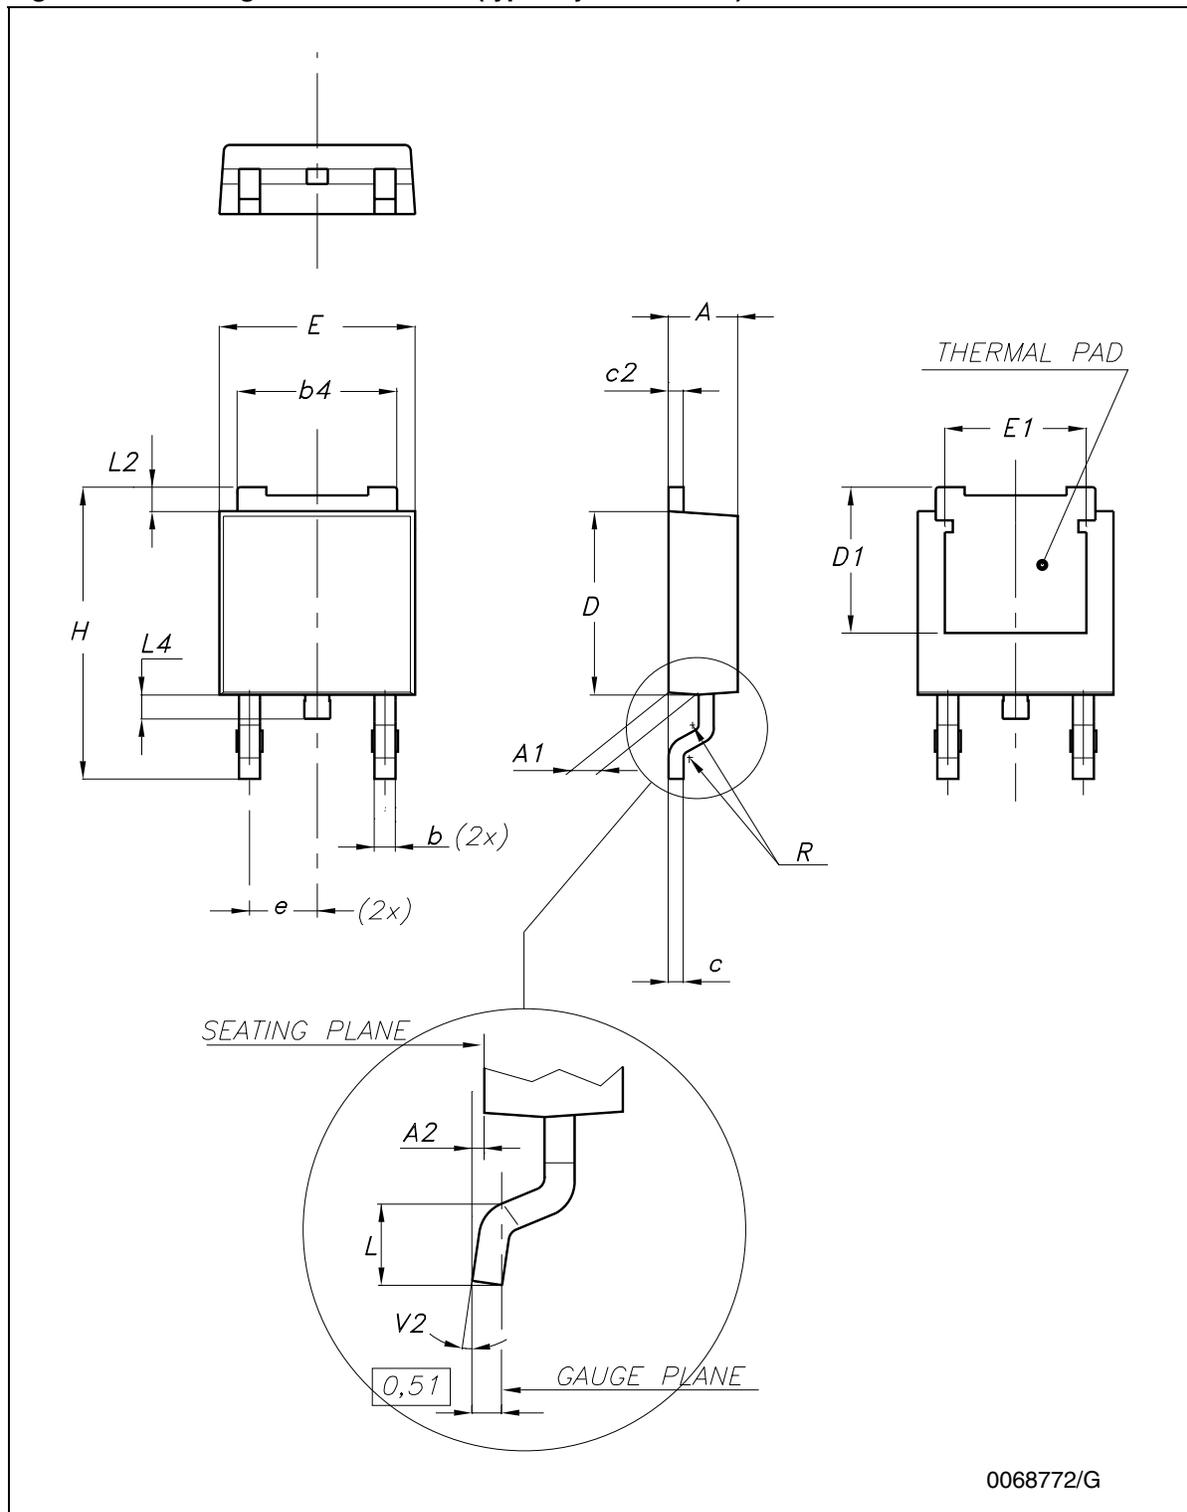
Drawing dimension DPAK (type IDS-subcon.)
